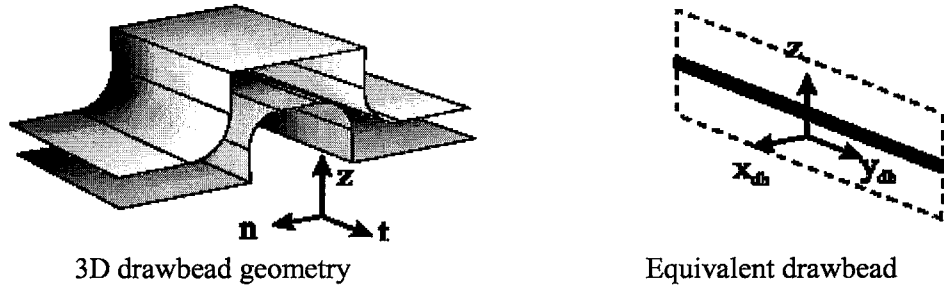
Schematic Drawing of a 3-Dimensional Drawbead and Its Equivalent Drawbead Representation
